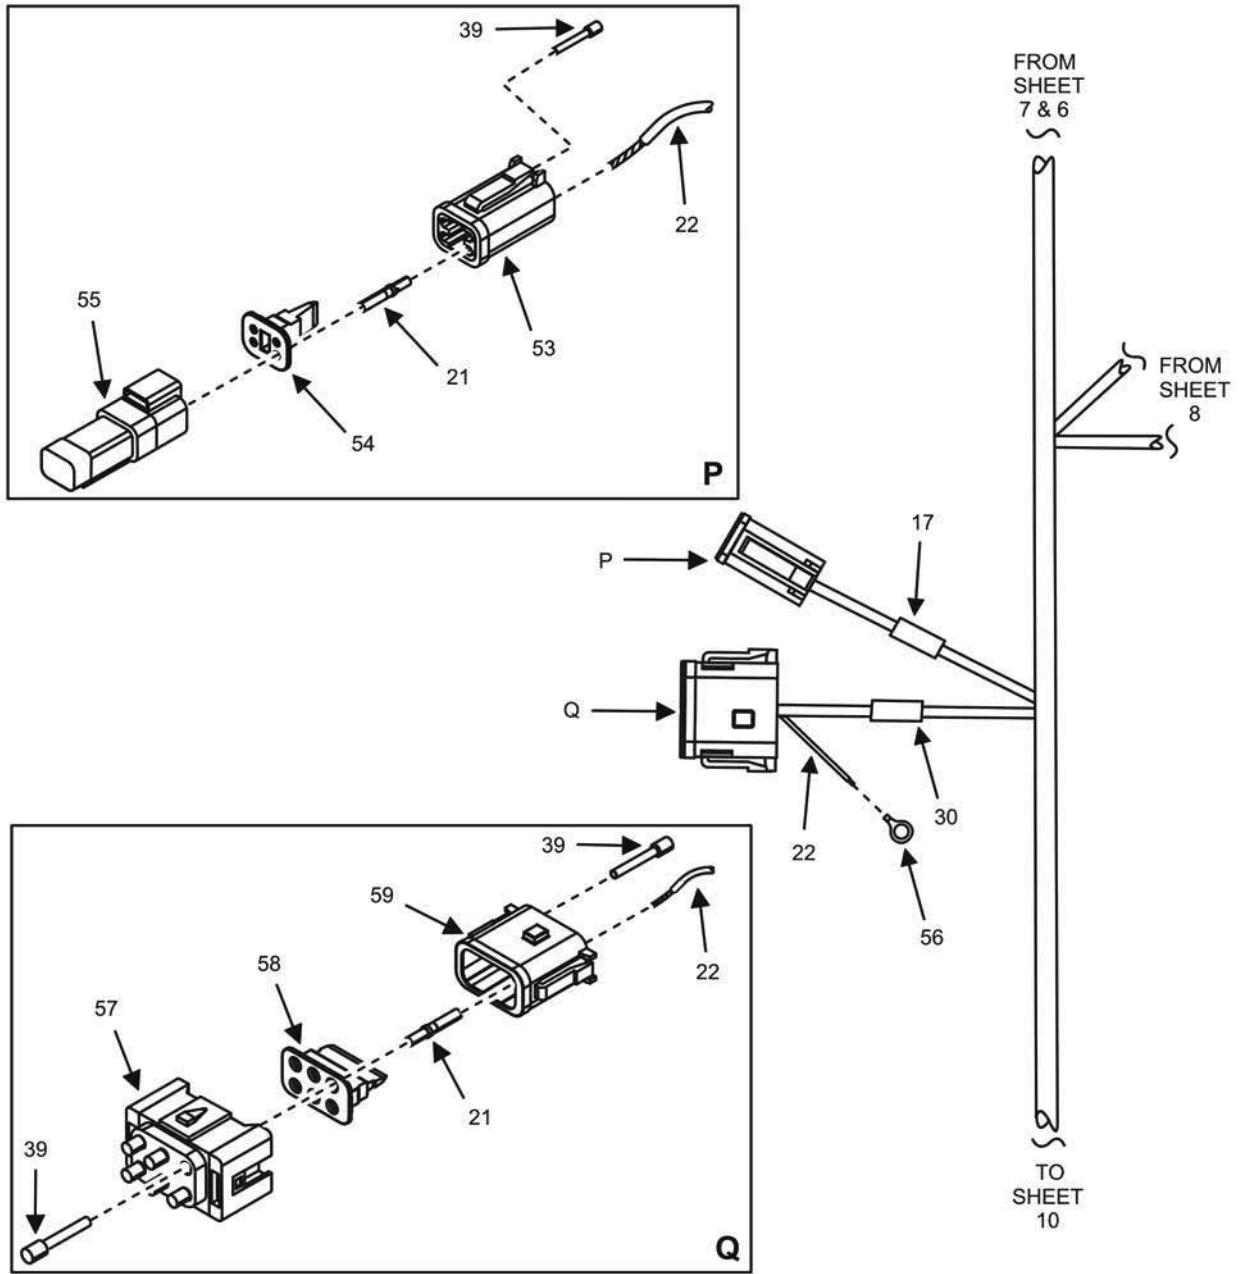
Engine Wiring Harness (Sheet 9 of 14).
